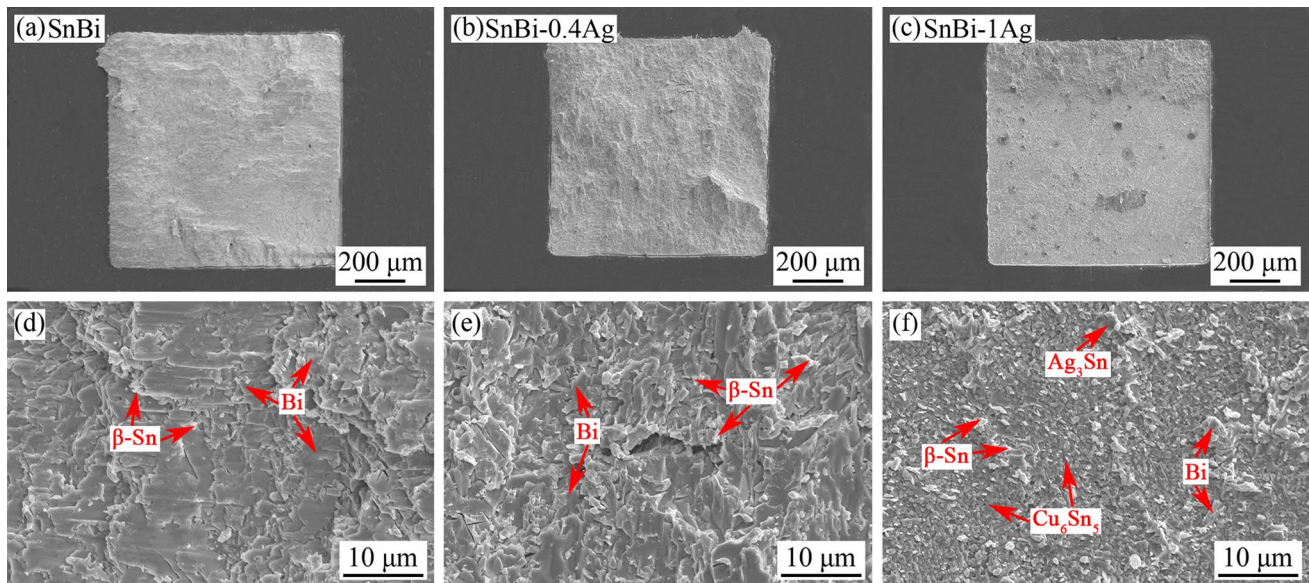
Shear fractures of the solder joints. a SnBi, (b) SnBi-0.4Ag, (c) SnBi-1Ag, (d–f) magnified morphology of (a–c), respectively
